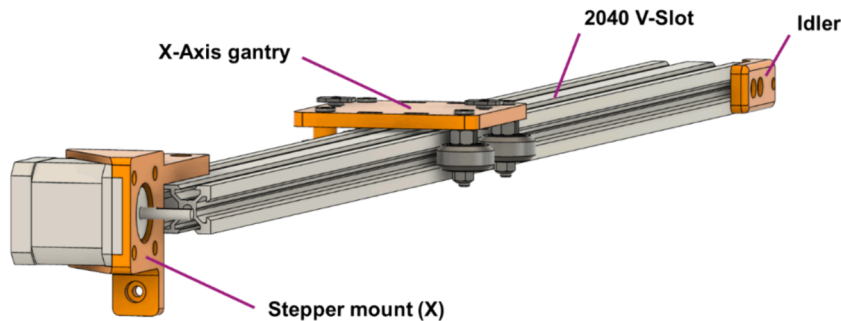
CAD model of the assembled X-axis. Note that several parts were omitted, including screws, pulleys and belts.
